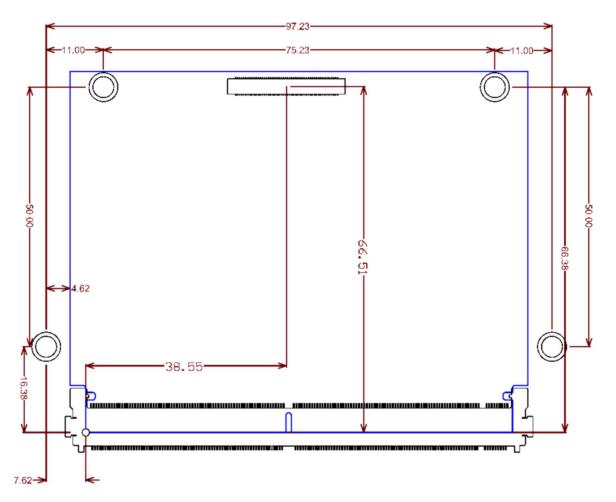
Recommended MitySOM-AM57F Carrier Card Outline with heat spreader mounting holes
